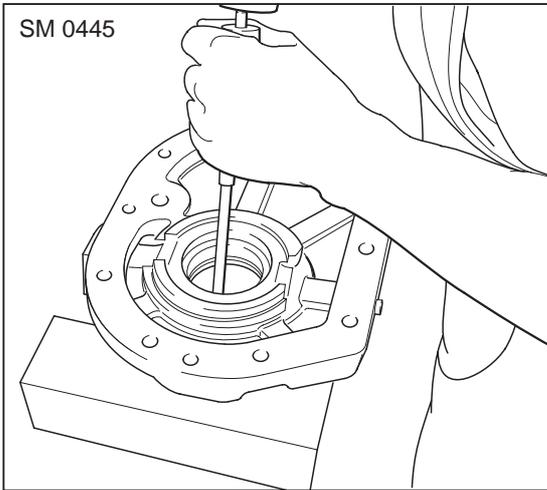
Removing Felt Ring and Adjusting Washers
